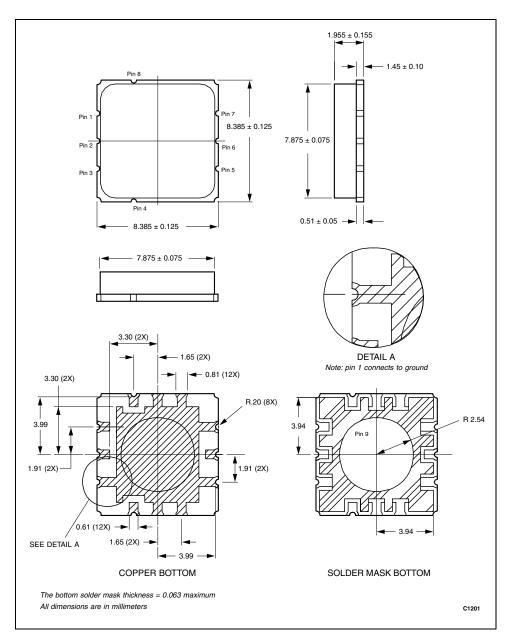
CX65101 8-Pin LCC Package Dimension Drawing
